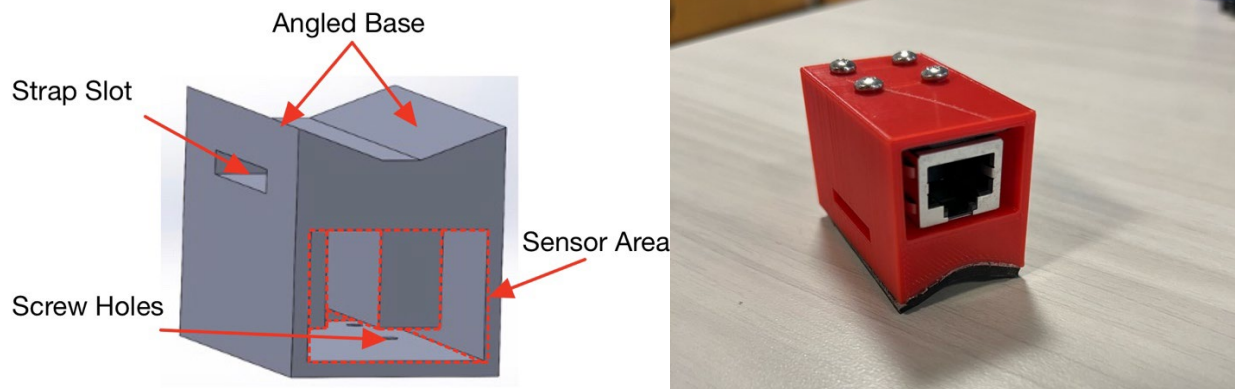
Accelerometer CAD and Housing with Accelerometer PCB Inserted
